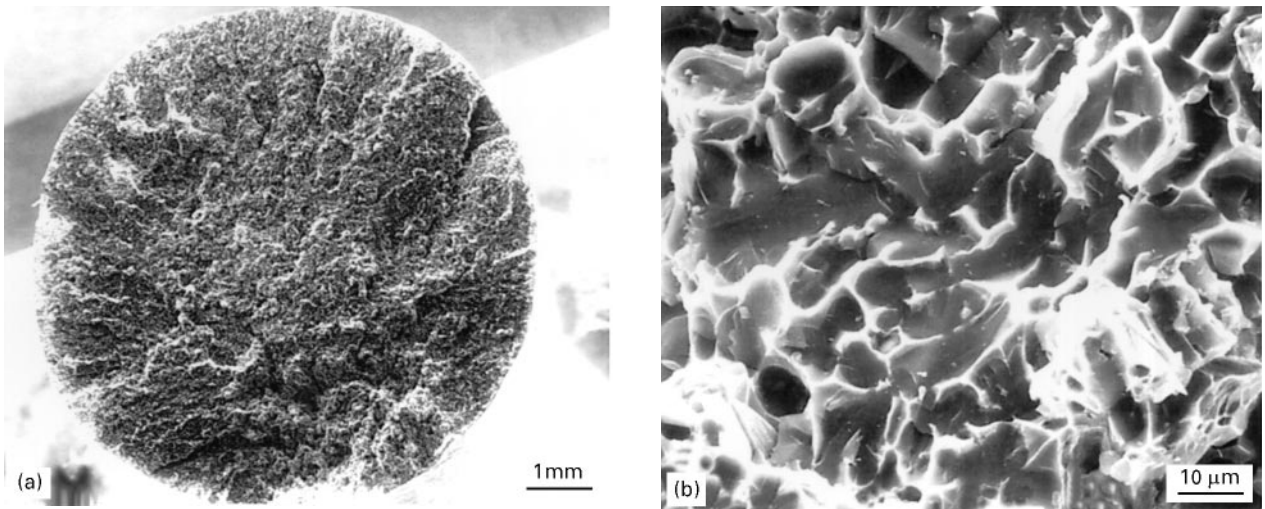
(a, b) SEM images of room-temperature tensile fracture surface of the extruded material.
